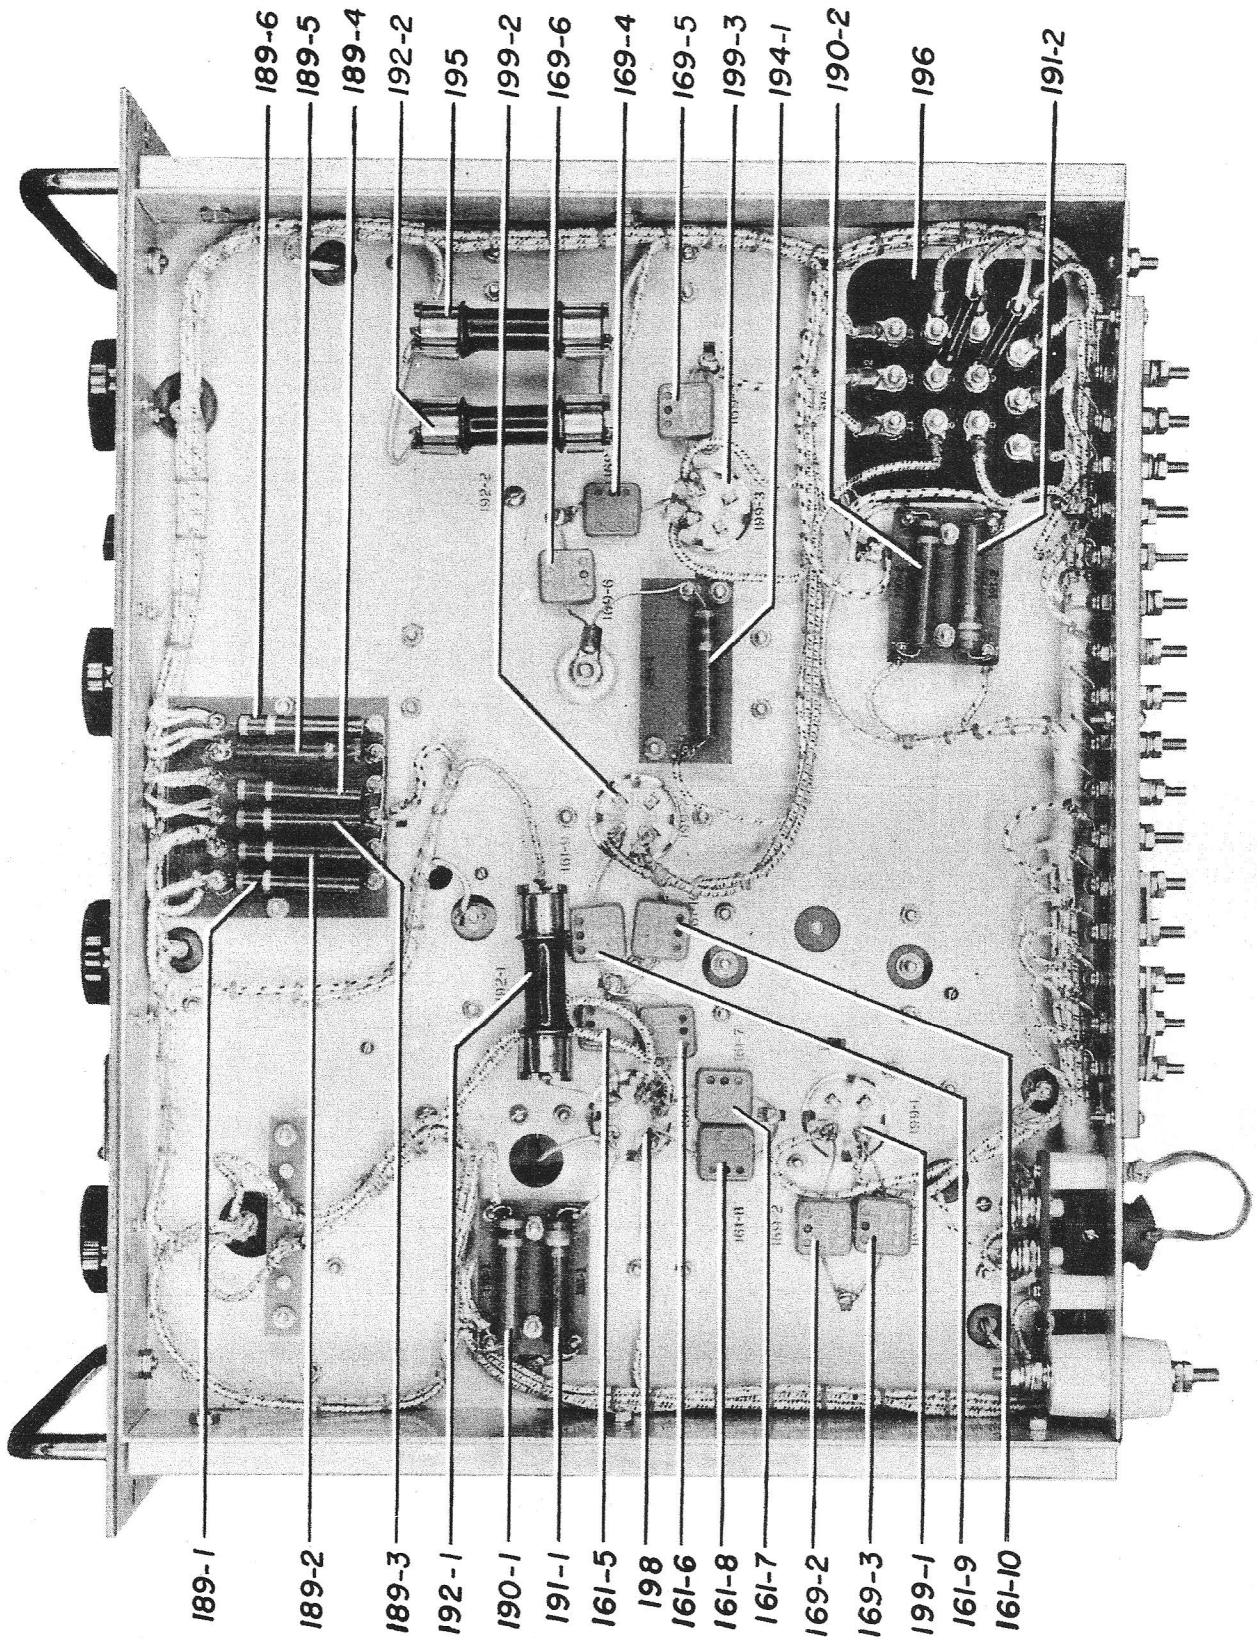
Oscillator Panel PN-9-B, Bottom View
